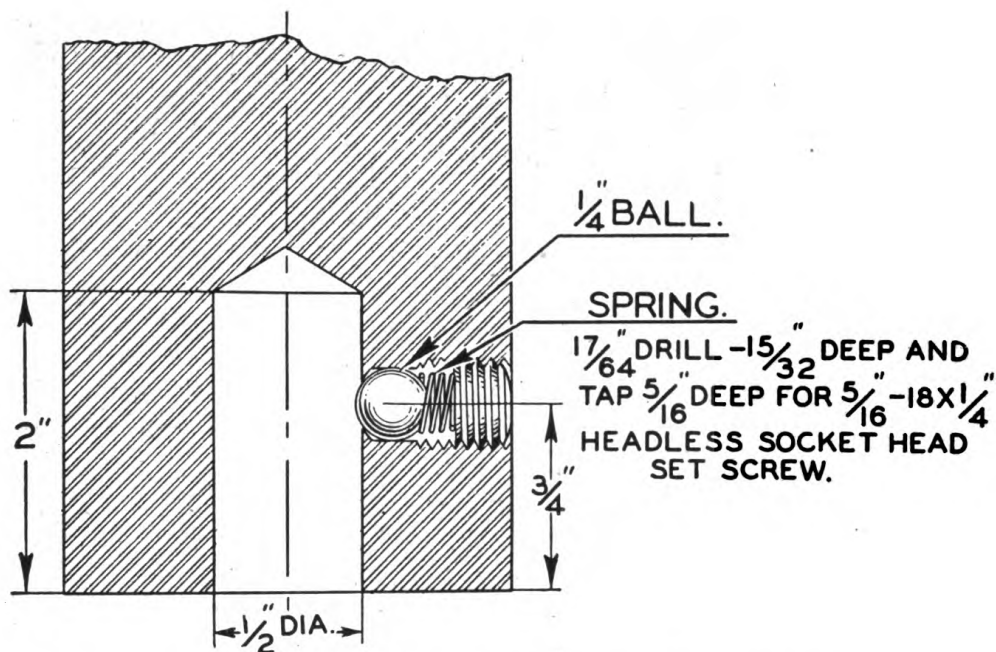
Drawing Showing Method of Adapting Ram of Arbor Press to Retain Case Magneto Tools
